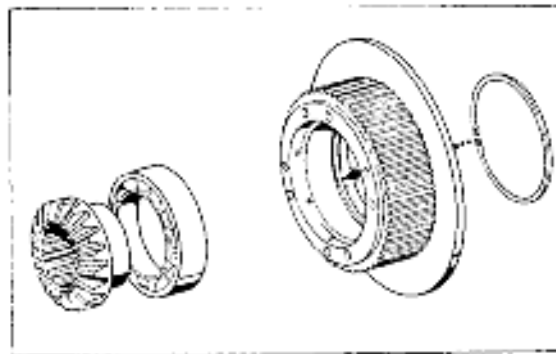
Reverse Clutch Flange, Roller Bearing and Bevel Gear (snap ring in HP clutches only; location arrow applies only to clutch no. 1-00100-2419 and 1-00100-2420).
